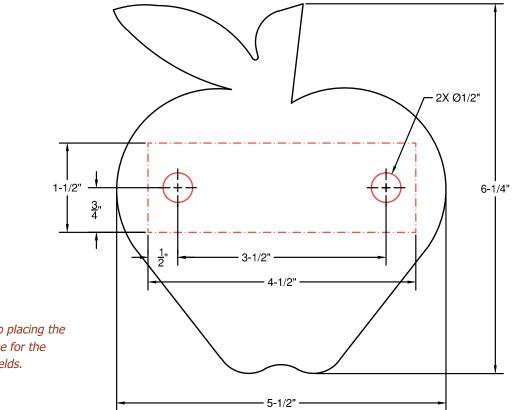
Guide to placing the holes in the base for the two plug welds.
